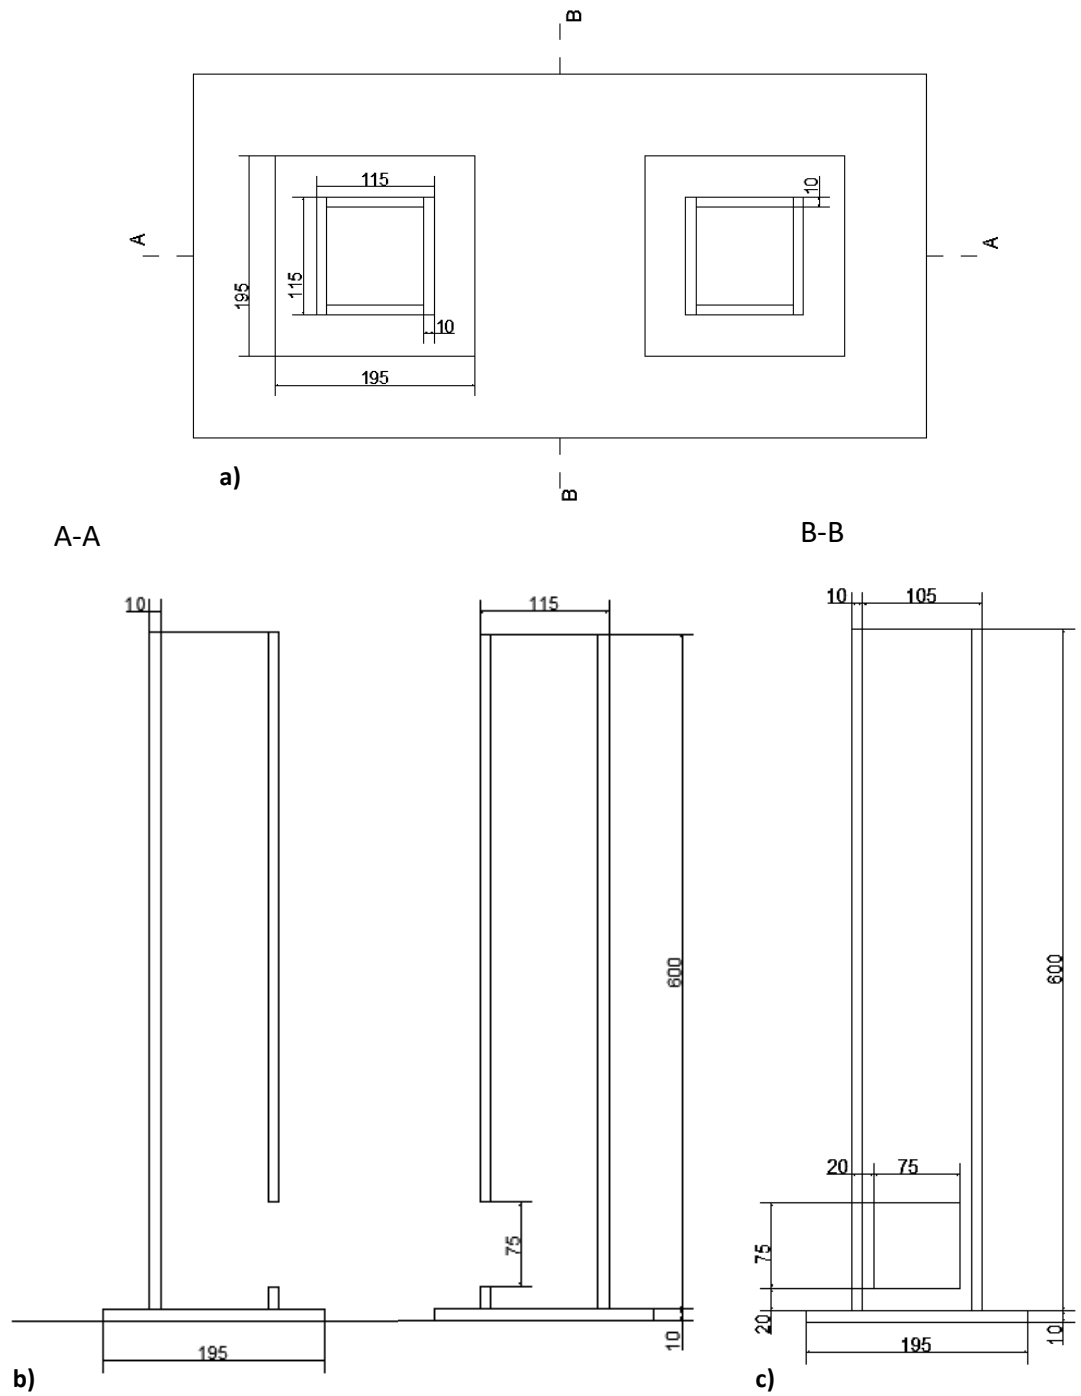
Tank design drawings (not to scale, all dimensions in mm) a) Plan view, b) Elevation about cut A-A and c) Elevation about cut B-B
